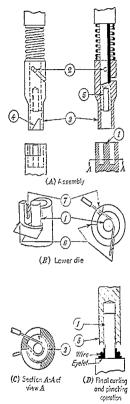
Die for wire-to-eyelet ax-embly: (A) assembly; (B) lower die; (C) section A-A of view A; (D) final curling and pinching operation. (3)
